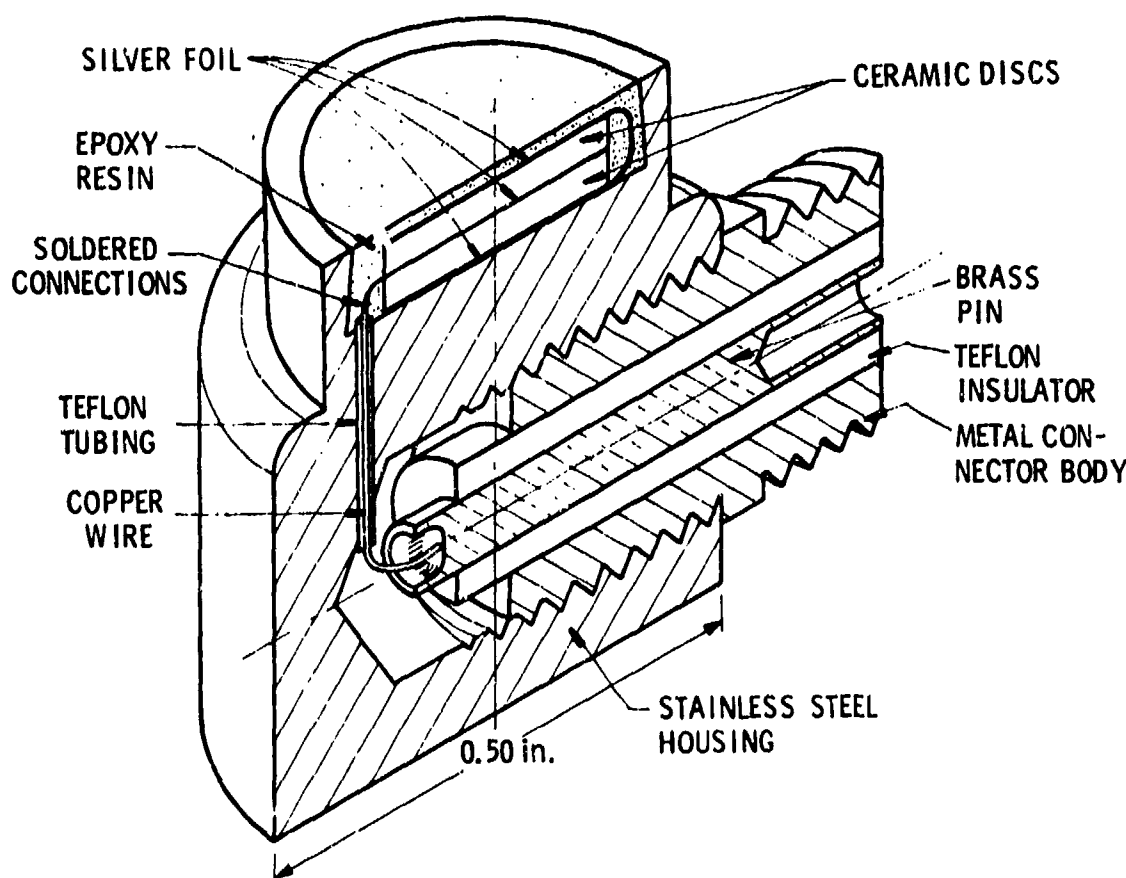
Sectional View of Gage of Baker and Ewing⁹
